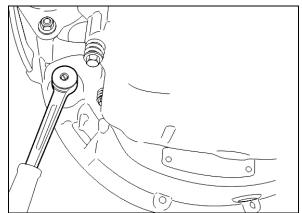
VOLVO ENGINE CRANKING POSITION
